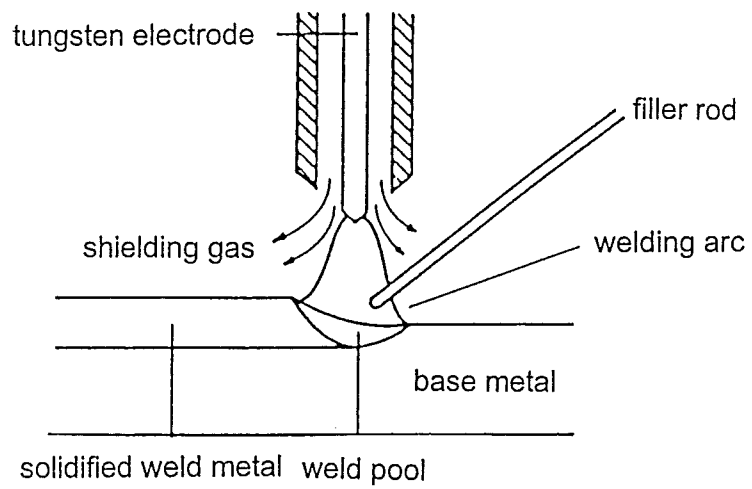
Schematic representation of the set-up for TIG welding [3].
